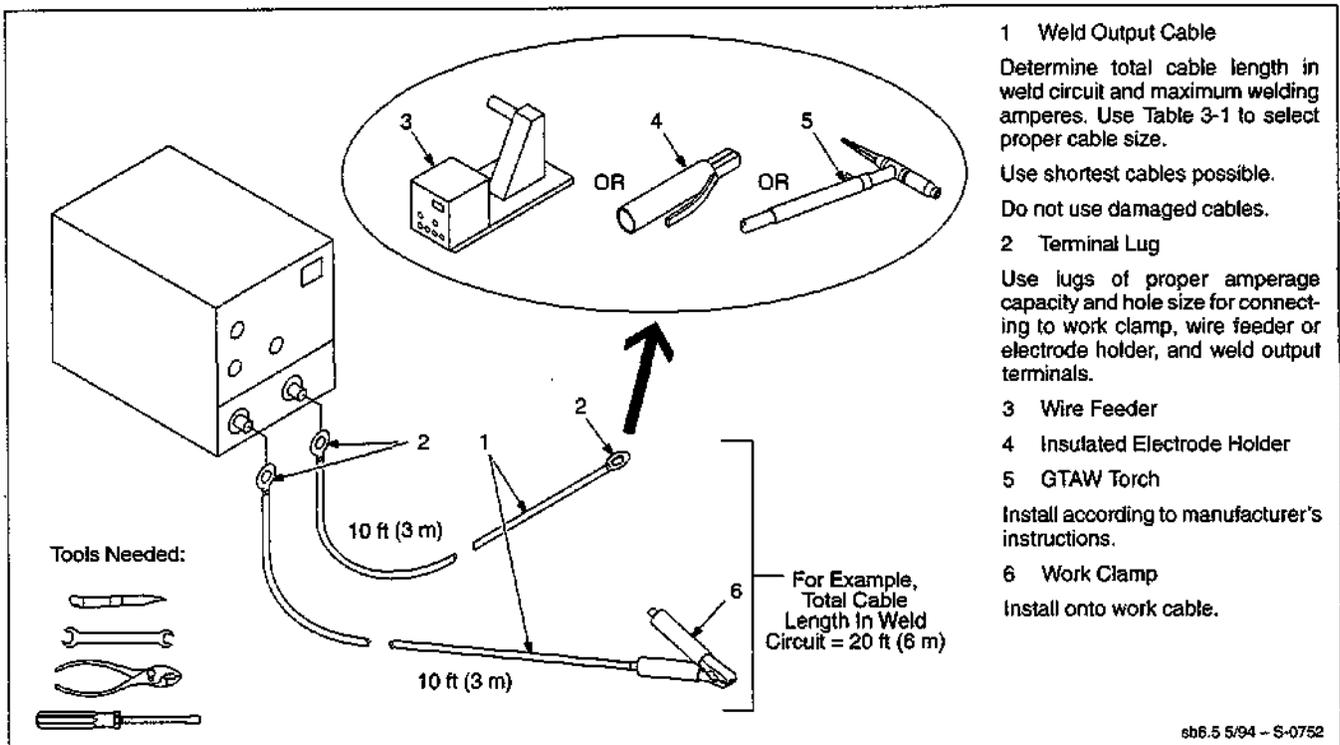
Selecting And Preparing Weld Output Cables
